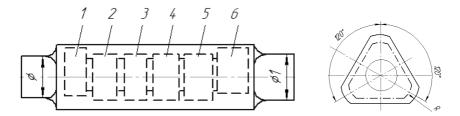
Sketch the workpiece of the six-throw crankshaft with a triangular cross-section
